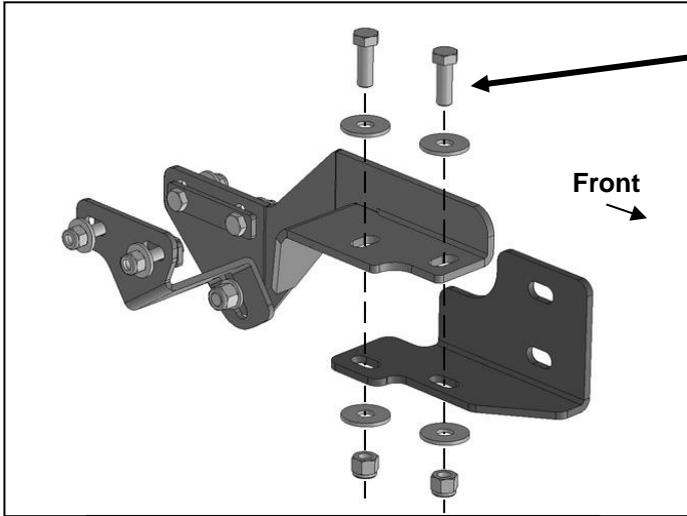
Attach Driver/left inner Support Bracket to Frame Bracket and Double Bolt Plate in frame (arrow)
